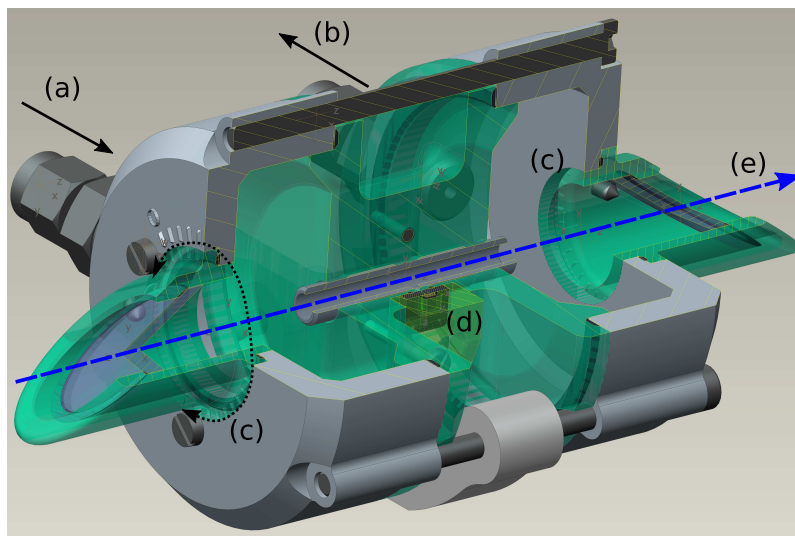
Cross section drawing of the photoacoustic cell (PAC). Gas inlet (a) and outlet (b), rotatable Brewster window mounts (c), socket for mounting various detectors (d) and laser beam (e).
